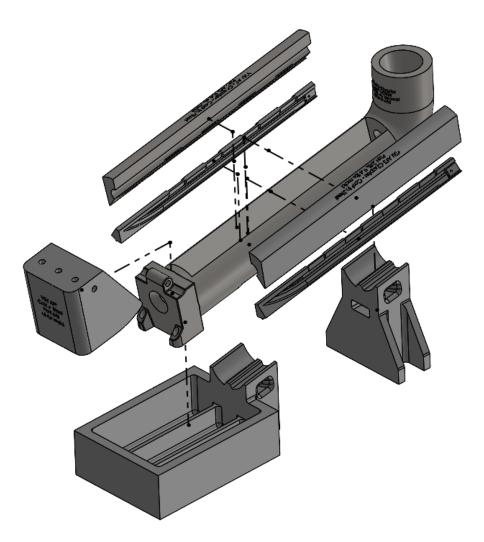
Exploded view of the 3D printed blade mold, 8 components.
